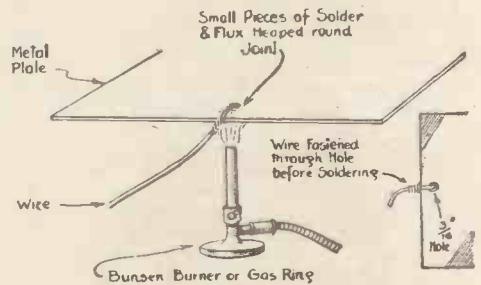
Hint for making a really good soldered joint between earth lead and plate. Important point is use of burner or gas ring for heating instead of soldering iron
